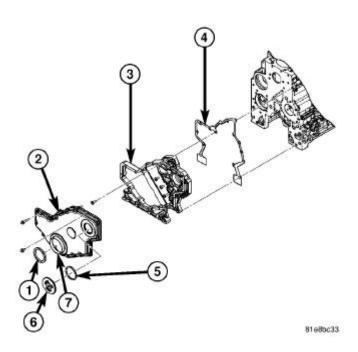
Front Cover Assembly Components Courtesy of CHRYSLER GROUP, LLC
